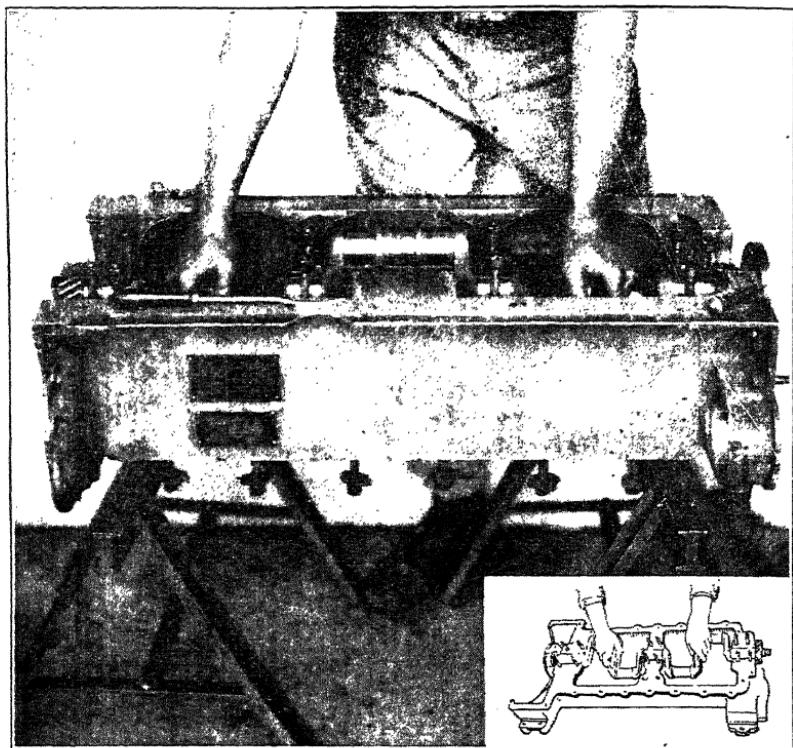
Getting an Impression When Fitting Crankshaft to Main Bearings by the Scraping Process
